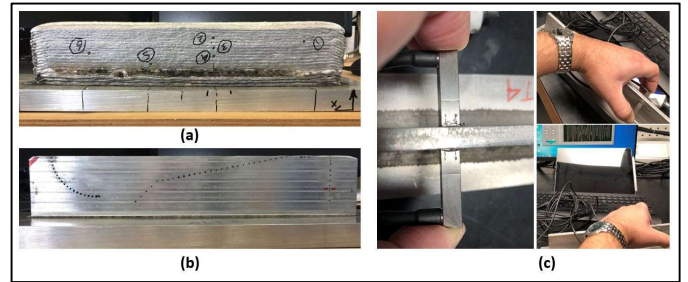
(A) AS-BUILT WAAM SAMPLE, (B) MACHINED WAAM SAMPLE AND (C) ULTRASONIC TOF MEASUREMENT USING THE PAUT METHOD ON THE MACHINED WAAM SAMPLE
